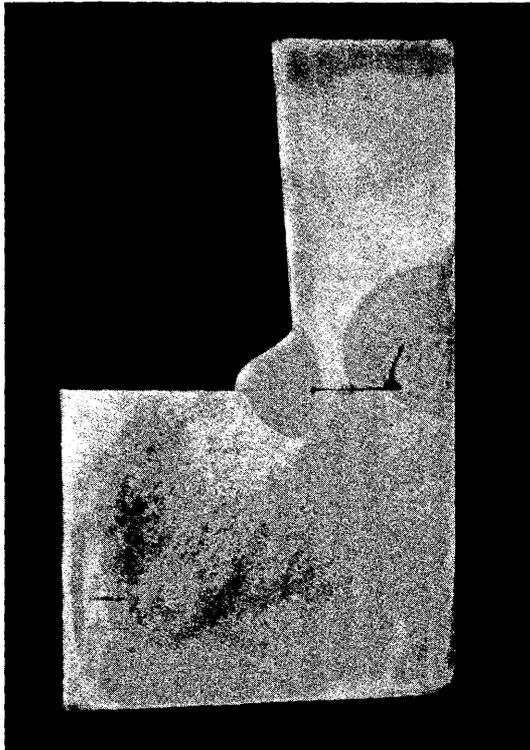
Cross section of a weld joint exhibiting hydrogen induced weld metal cold cracking; this crack is oriented longitudinally but weld metal cracks may be oriented in other directions depending on joint restraint
